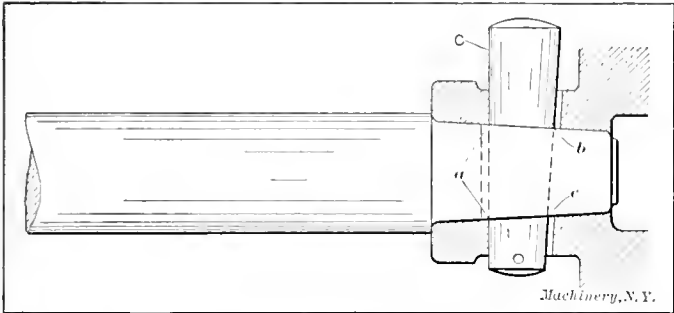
View showing Method of Securing a Piston-rod to its Cross-head by a Key or Cotter
